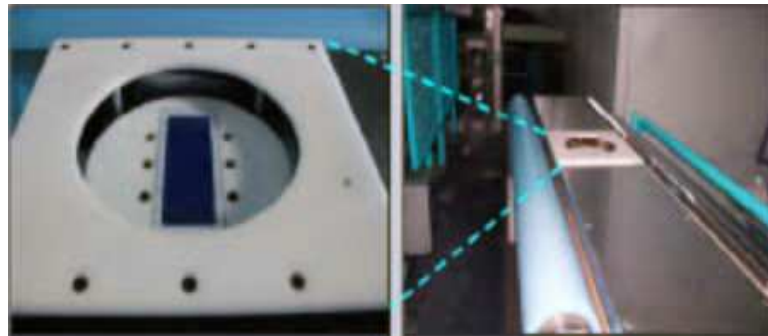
Magnetic probe head and carrier integrated in a roller table position at ThyssenKrupp steel
